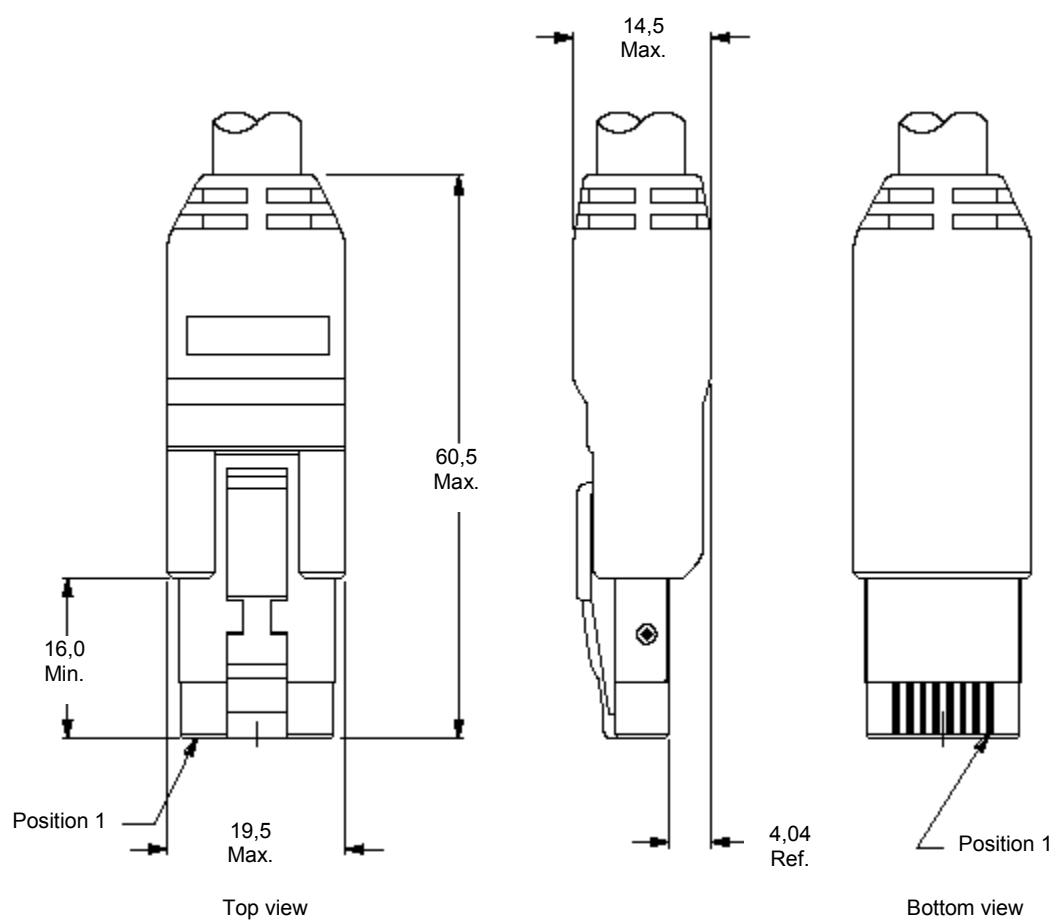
Free cable connector (EC) straight (version 1) (SA)
